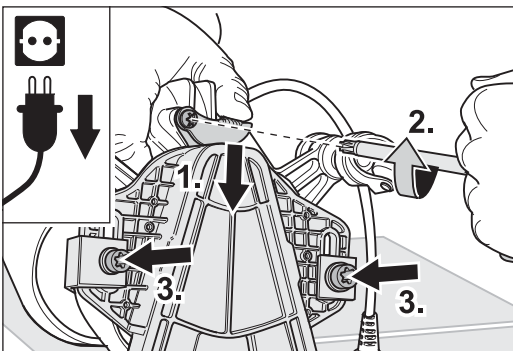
Hold the FLIP® by the fan housing, press on the belt tightening plate (1.) and retighten the three screws (2. and 3.).
